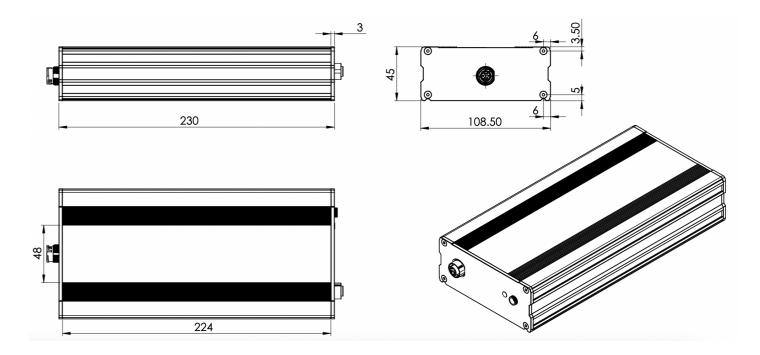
Dimensions of transducer box (all dimensions are in millimeters)
